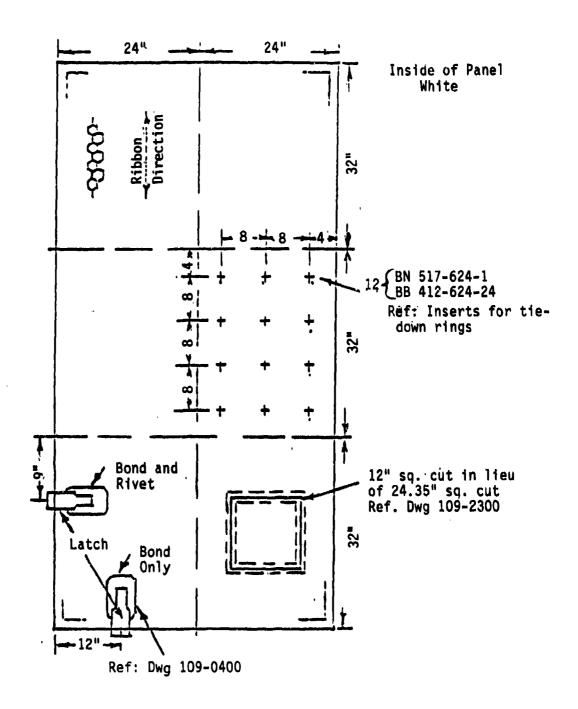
Inside of Hardware Panel Showing Location of Latches, Inserts, and Cutout.
